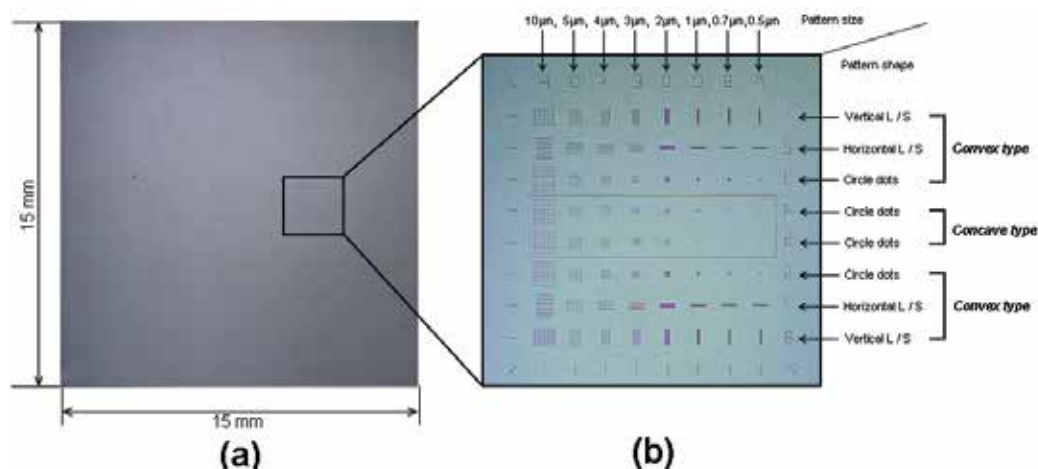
Photographs of electroformed-Ni mold and mold patterns.
